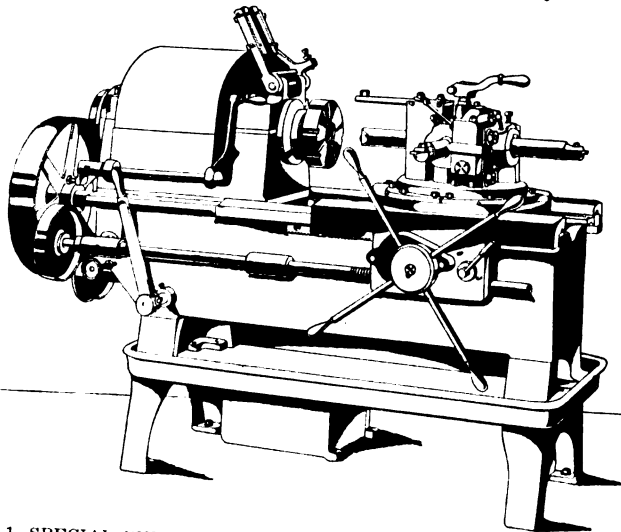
SPECIAL-PURPOSE CHUCKING LATHE USED FOR SHELL OPERATIONS
